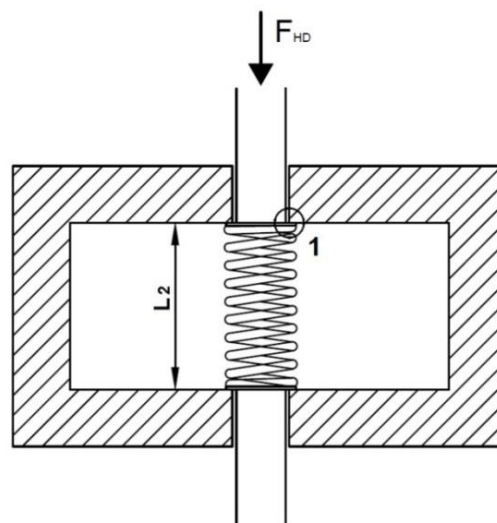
Schematic cross section of the holddown device mounted in the fuel assembly head
